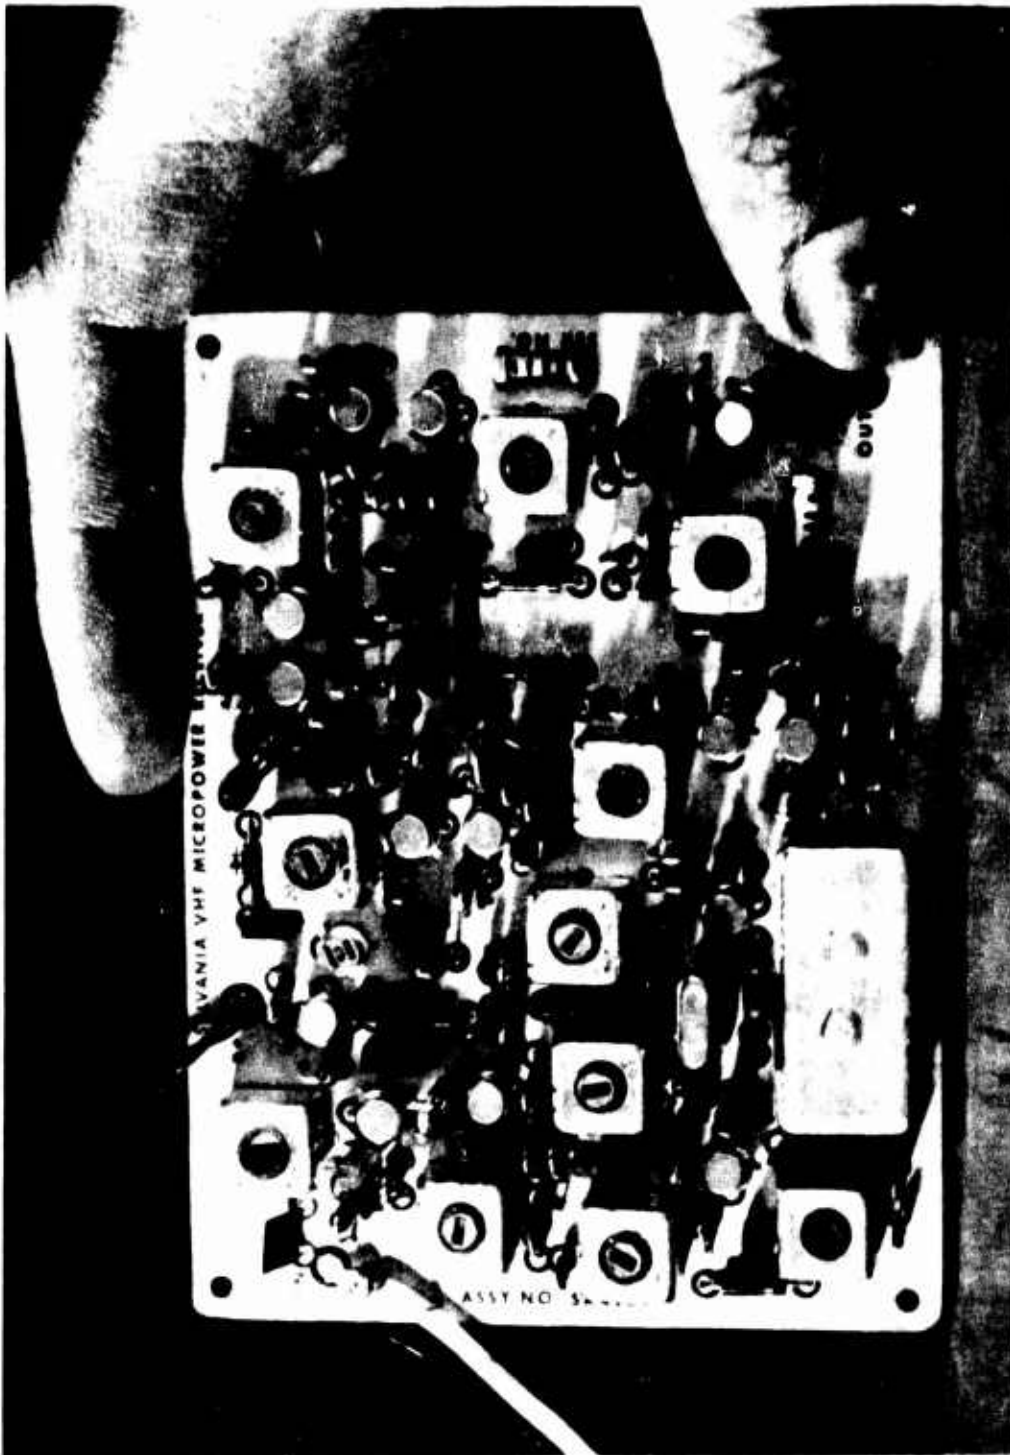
(b) Photo of VHF FM Receiver PCB
